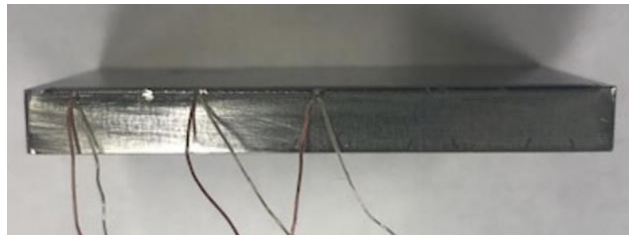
Thermocouples spot welded to the top edge of a 50.8 mm x 25.4 mm x 6.35 mm Inconel 718 build plate for future work.
